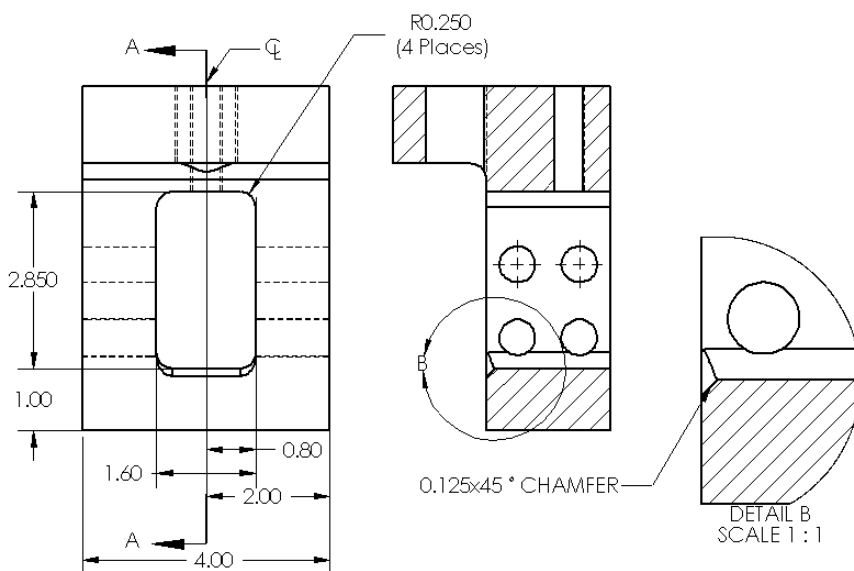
Side and sectional view of the Combined Loading Shear test fixture. Dimensions are in inches.
